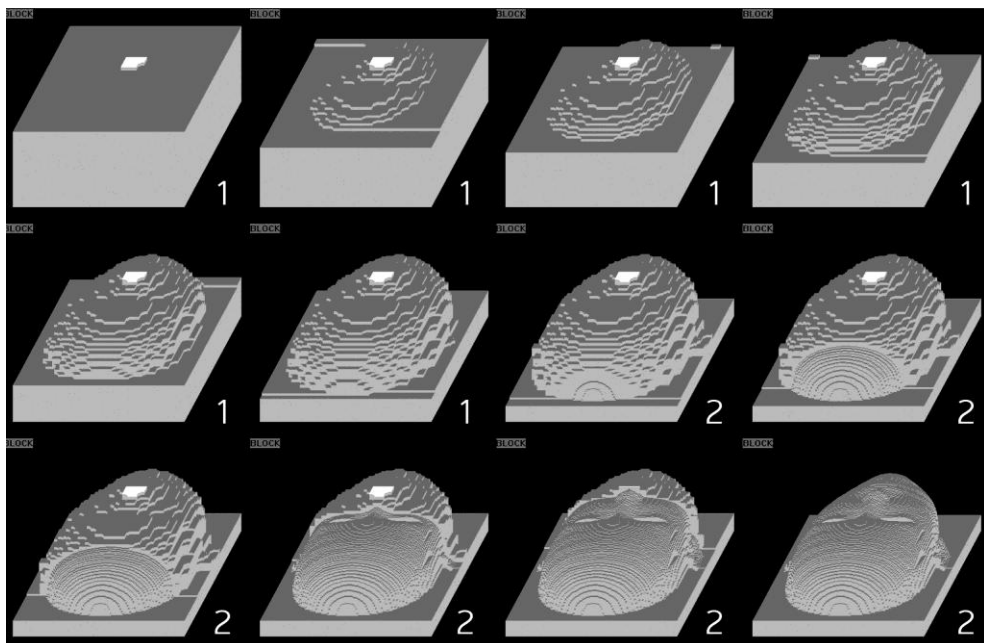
Two phases of 2,5-axis milling machine: (1) roughing, (2) finishing
